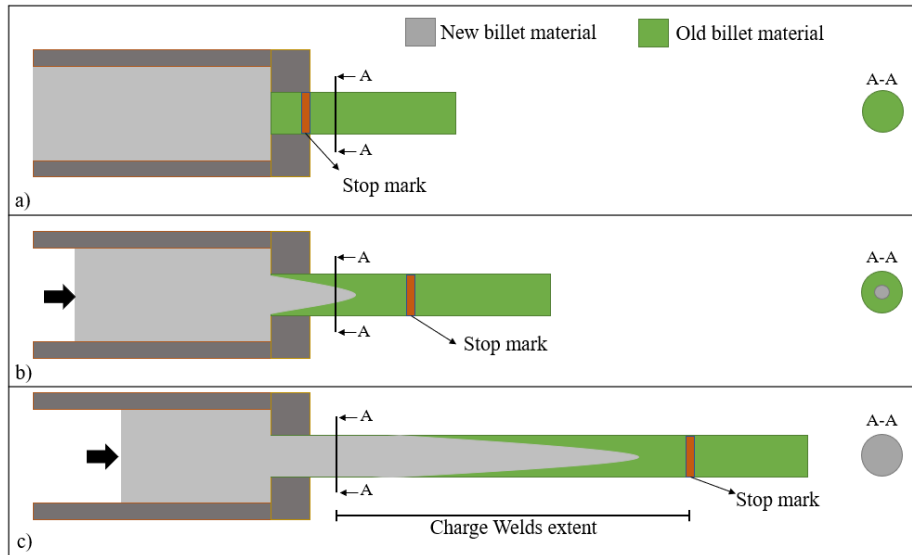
Schematization of the Charge Welds generation. a) Start of the extrusion process, b) interaction between new and old billet material in the profile, c) Charge Welds extent.
